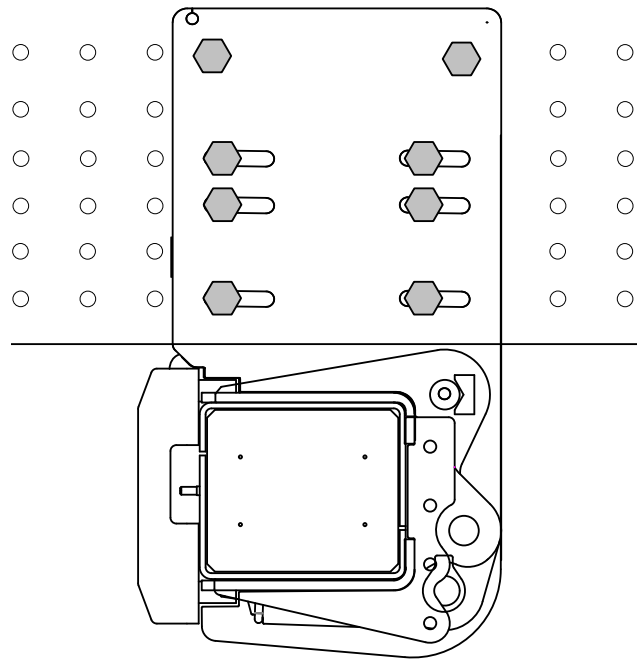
Installing the chassis bracket on vehicle chassis with pre-drilled holes
